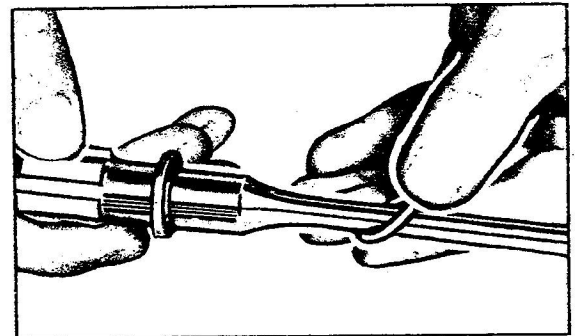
Removal of Pencil Drive Shaft Gasket
